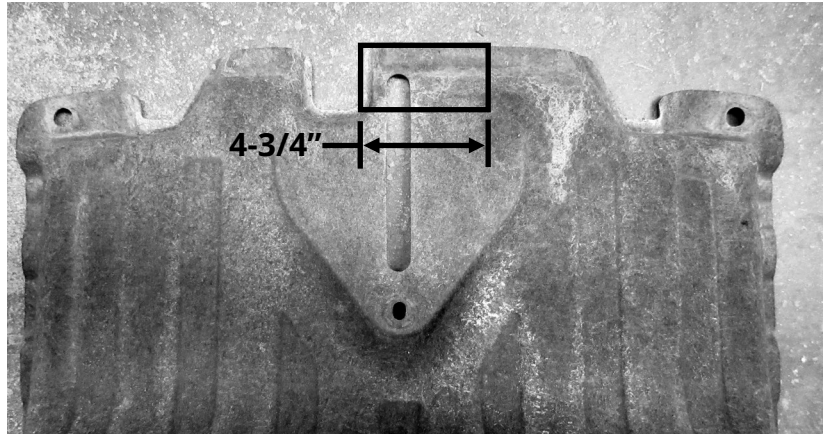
VIEW UNDER THE REAR OF THE VEHICLE
